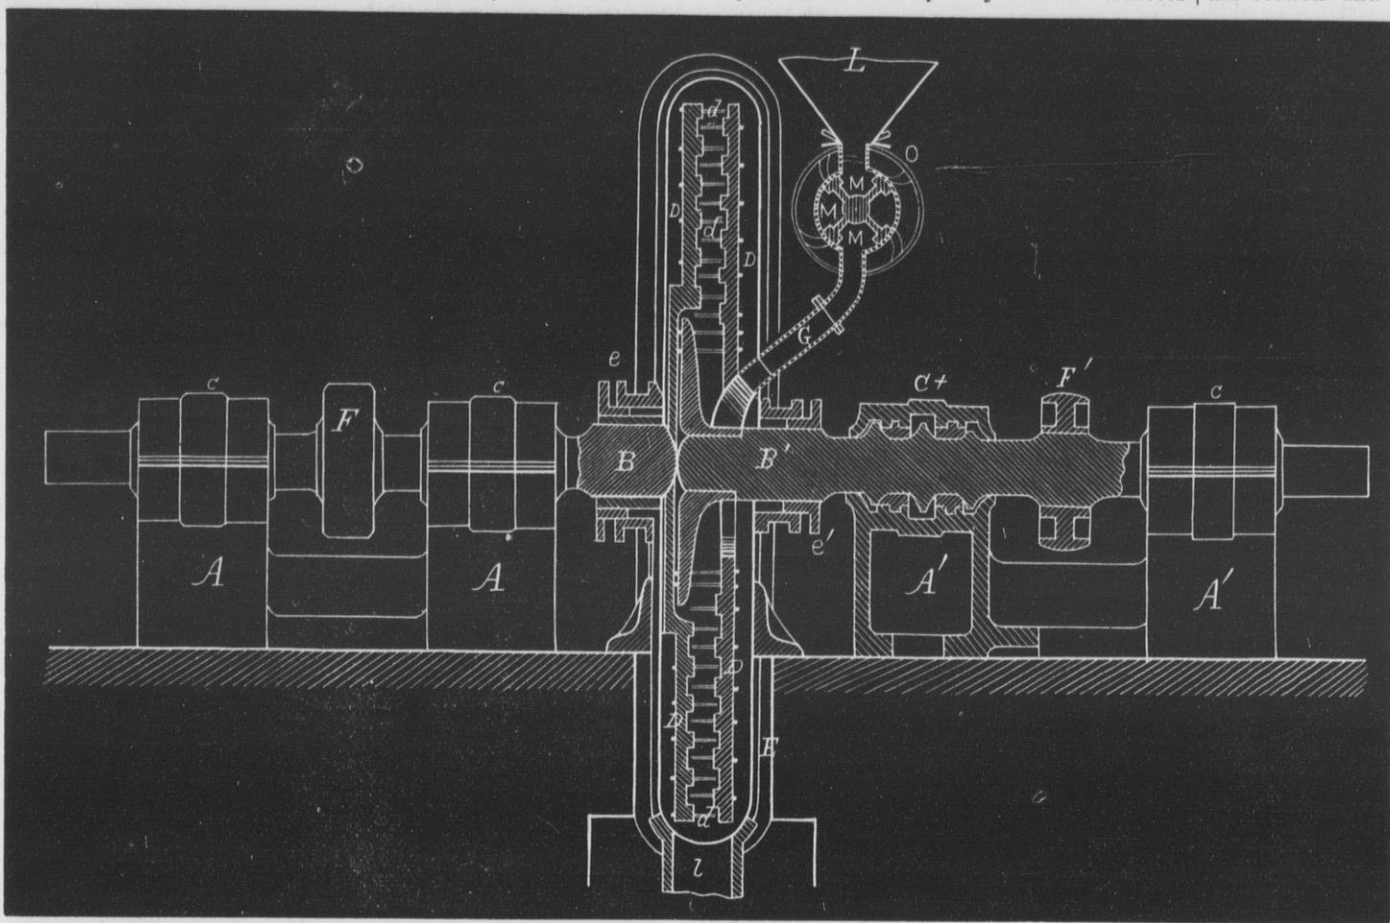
CARR-TOUFFLIN DISINTEGRATING FLOUR MILL.—PART SECTION AND PART ELEVATION.
